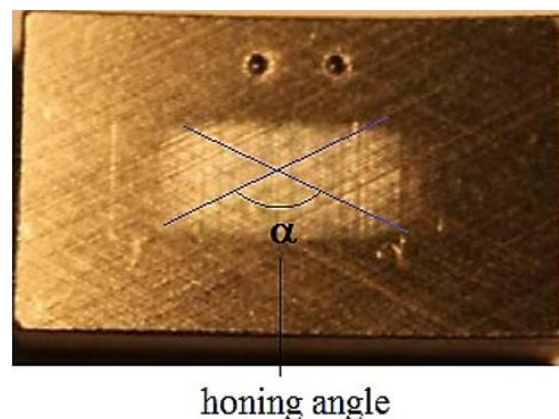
Honed cylinder liner surface texture (adapted from [13]).
